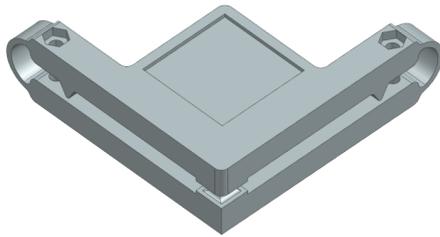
PKM one part design using springs at the ends and bolts for actuation
